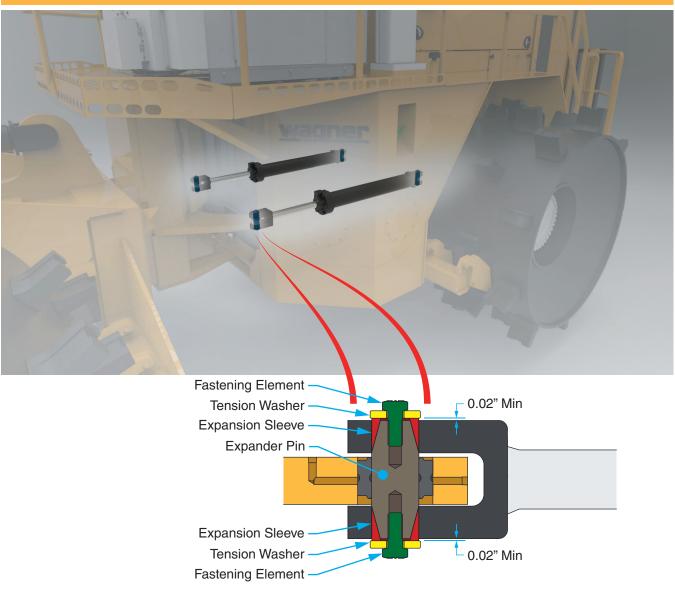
Steering Cylinder Pins (LC120 Installation Shown)
